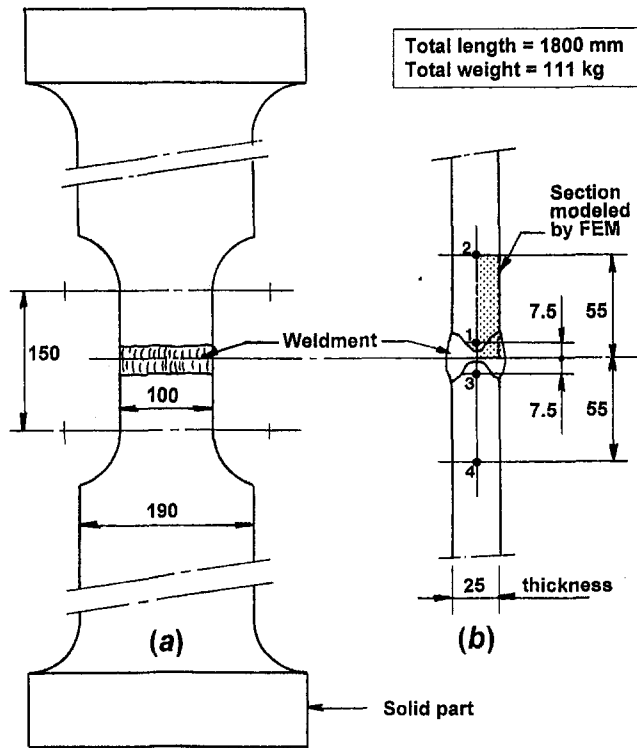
Geometry of the large full-size specimen—(a) dimensions in millimeters; (b) general view of the four extensometer setting points
